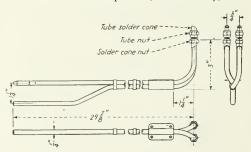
Standard Pitot-Static Tube. 1. Solder Cone Nut; 2. Tube Nut; 3. Tube Solder Cone.
